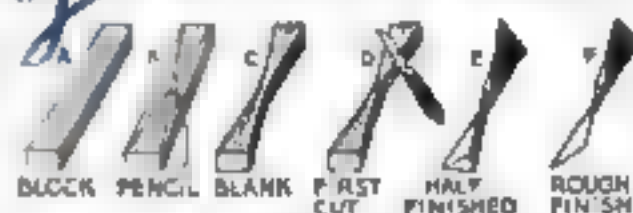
Steps in whittling the airplane propellers, the propeller shafts, hanger, and wire holder for balancing propellers.
